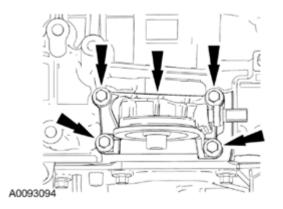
Locating Bolts And Oil Filter Adapter Courtesy of FORD MOTOR CO.
